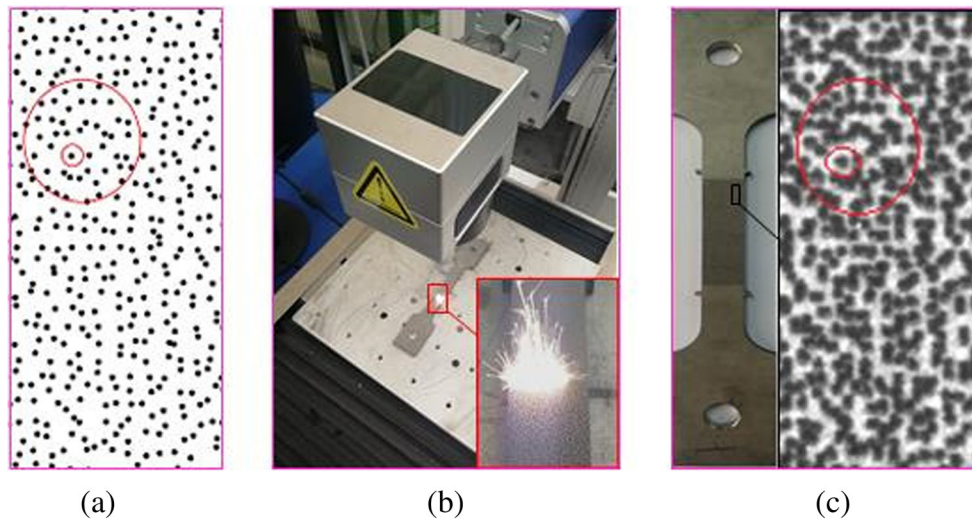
Laser engraving machine and engraved speckles: (a) computer-generated speckle pattern; (b) laser engraving system; (c) laser-engraved speckle pattern based on the computer input
